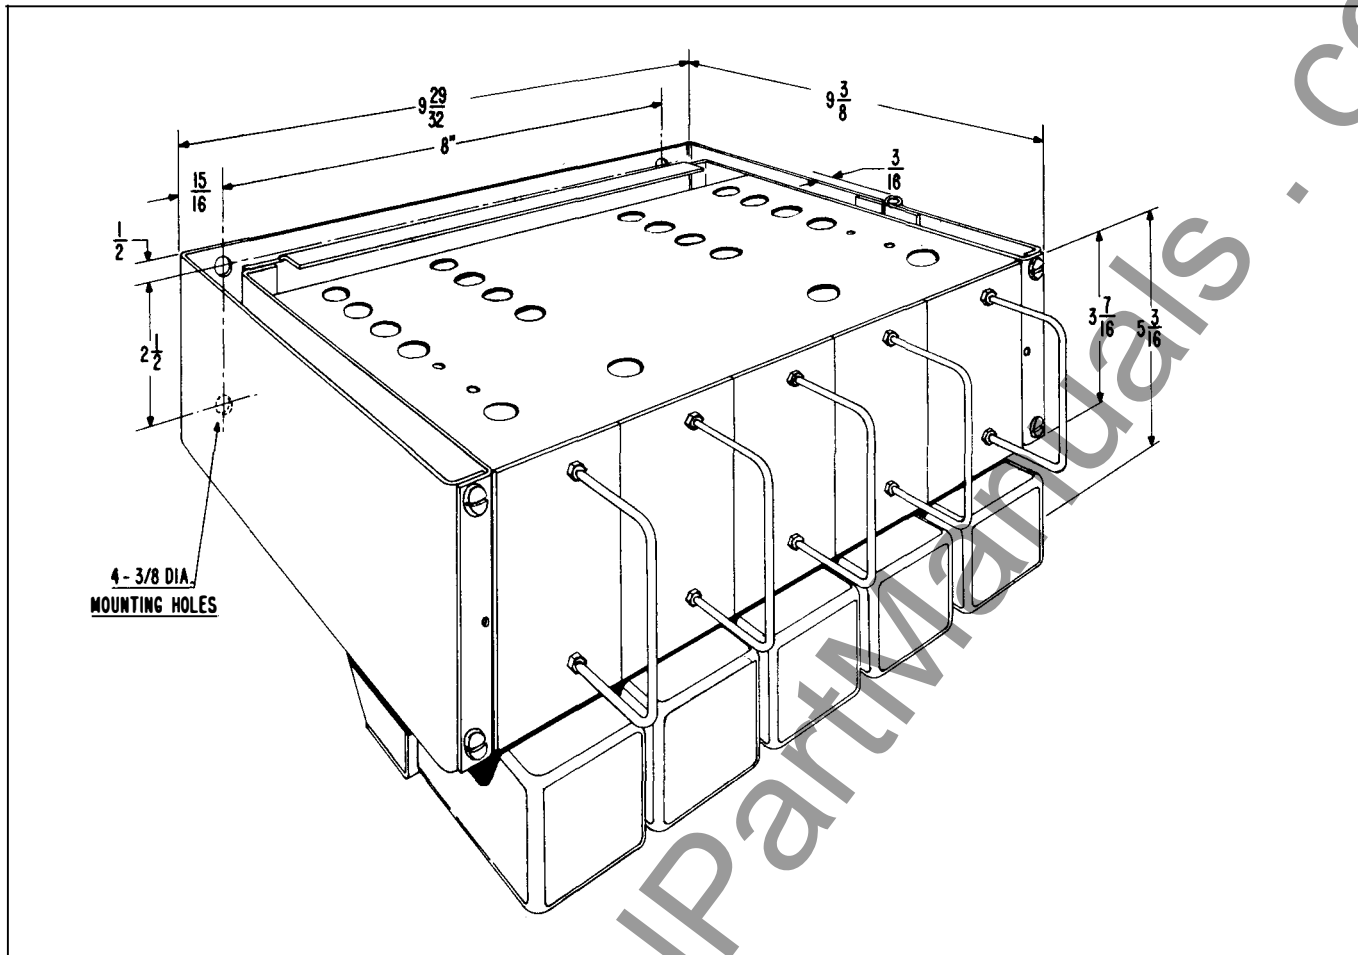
Outline and Drilling Plan of 5 Module Chassis
